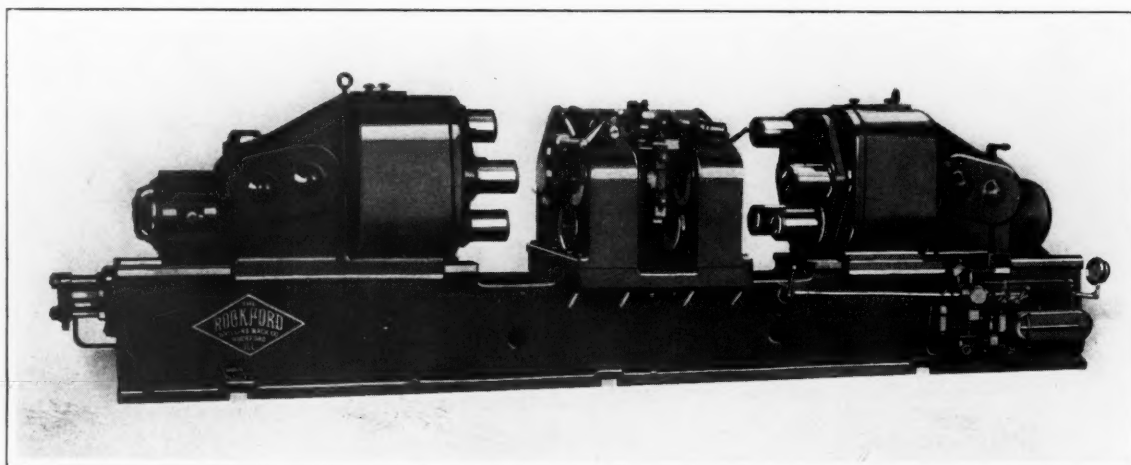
Automatic Drilling, Boring, Facing, and Reaming Machine Built by the Rockford Drilling Machine Co.
